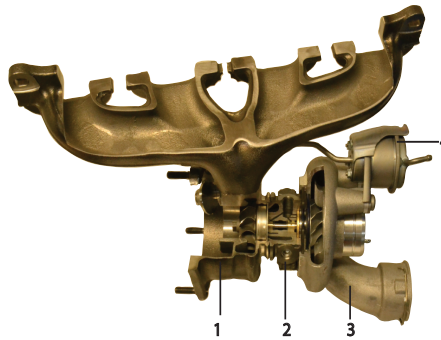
A cut-through automotive turbocharger showing (1) the turbine housing, (2) the rotor-bearing system, (3) the compressor housing and (4) the wastegate mechanism to bypass exhaust gasses over the turbine.
